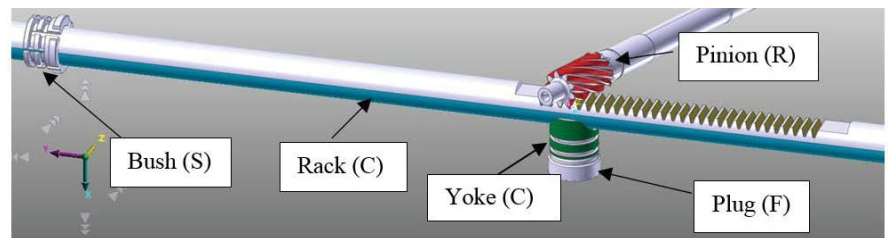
Mechanical Steering Gear Model; R: revolute joint, C: cylindrical joint, S: spherical joint, F: fixed joint
